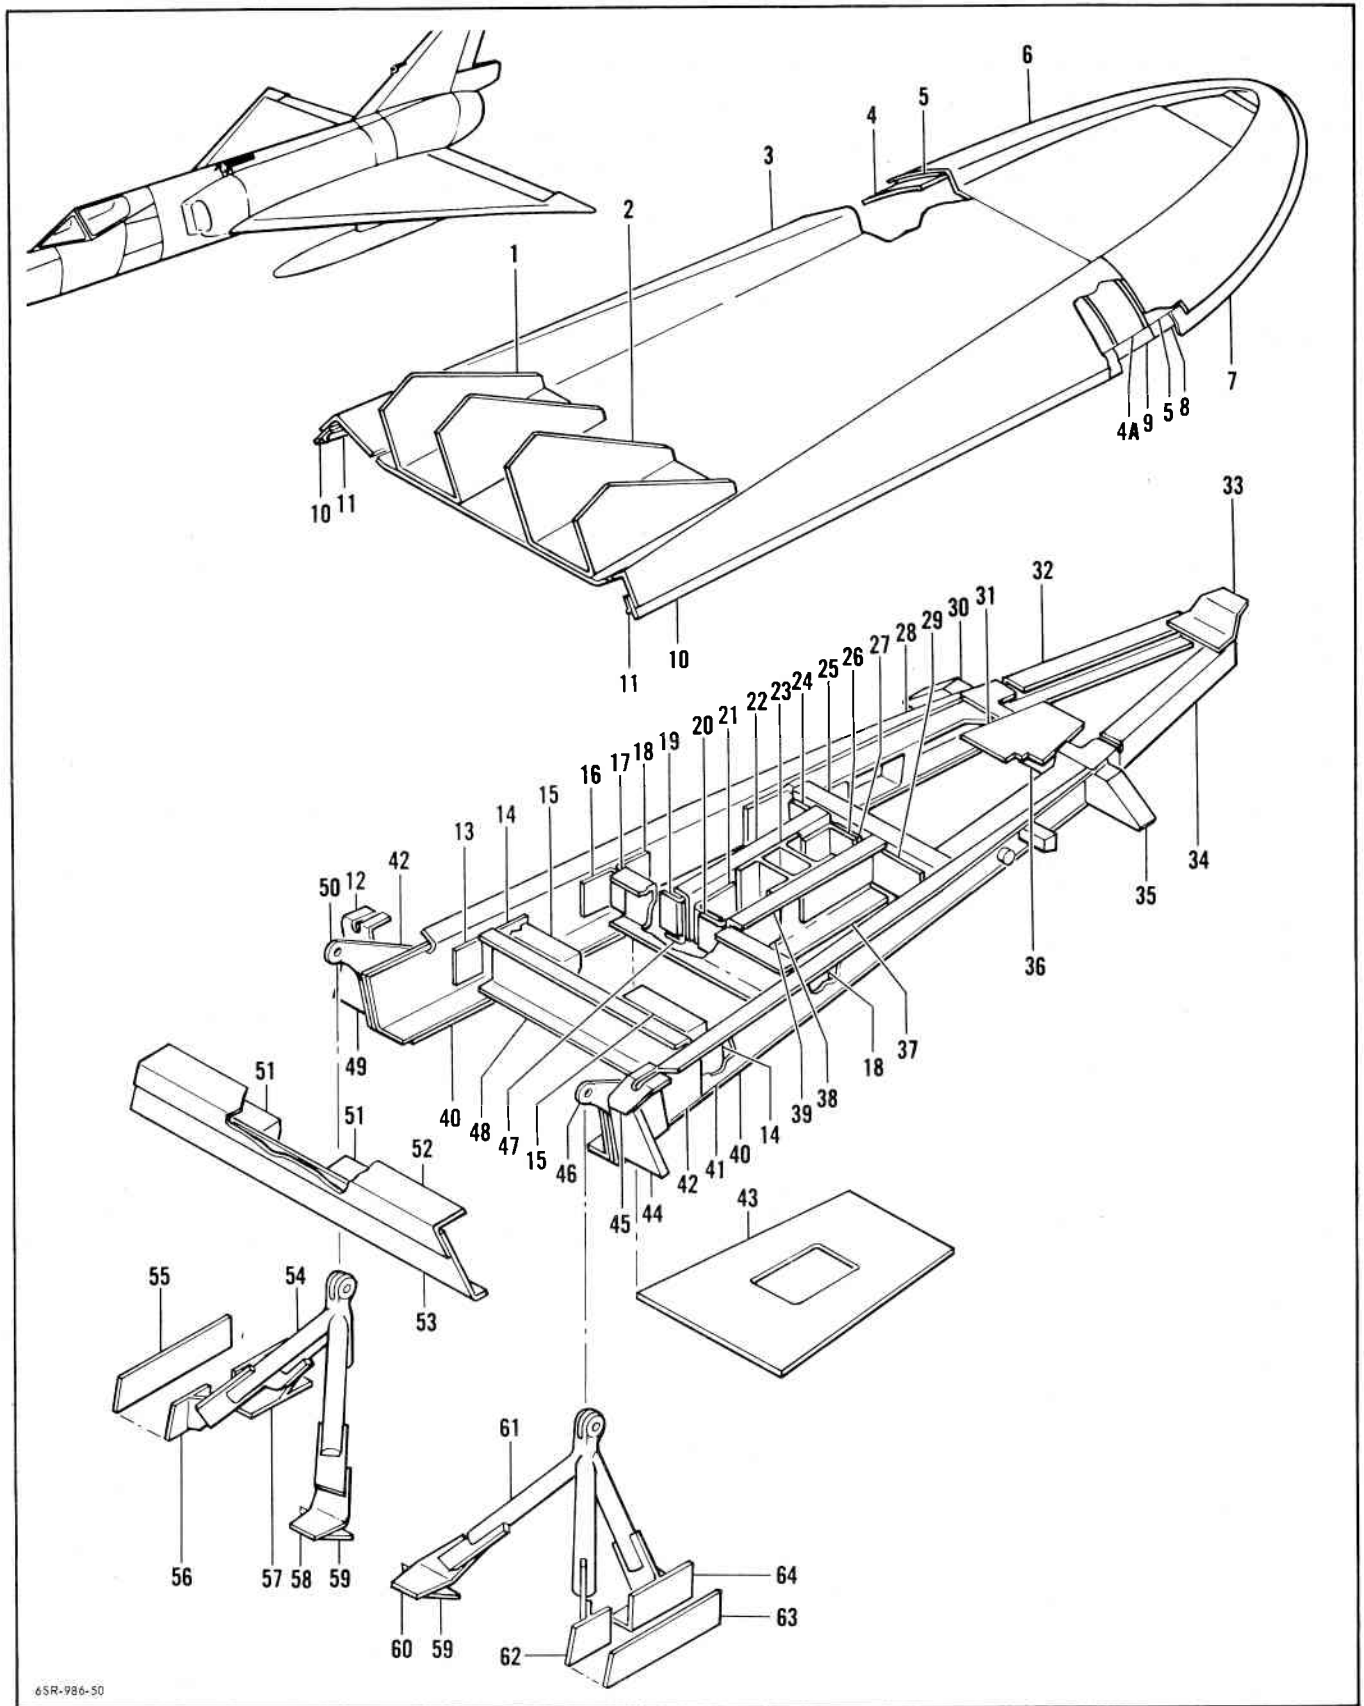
B. Aerial Refueling Slipway Door and Hinge Supports, F-106A (Sheet 1 of 3)
